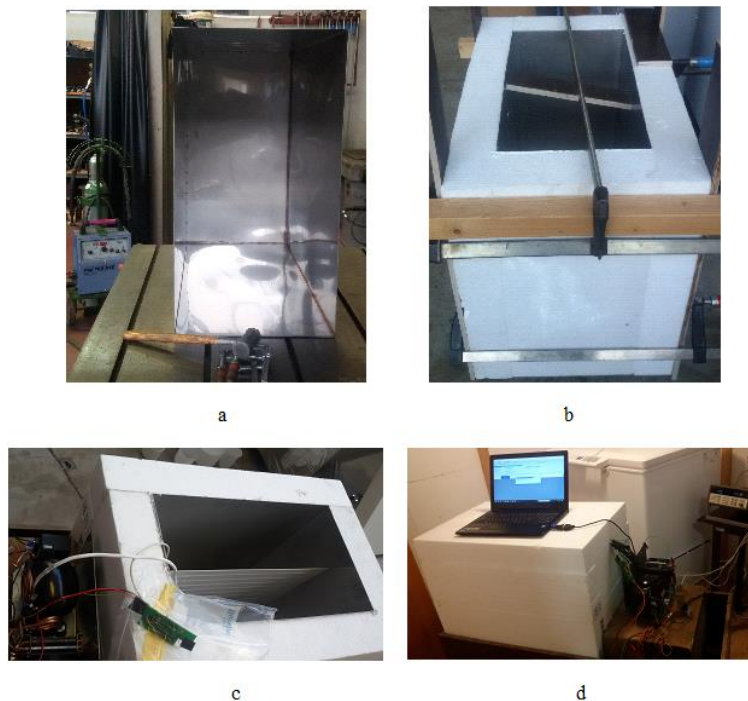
8 Pictures from fabrication process in the workshop (a) Cutting, bending and welding of the metal box (b) Fixing insulation to the metal box (c) Assembling VCRC unit with insulated box (d) Functionality testing in a climate chamber
